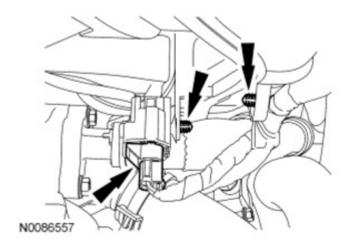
Locating Knock Sensor Electrical Connector And Pin-Type Retainers Courtesy of FORD MOTOR CO.
